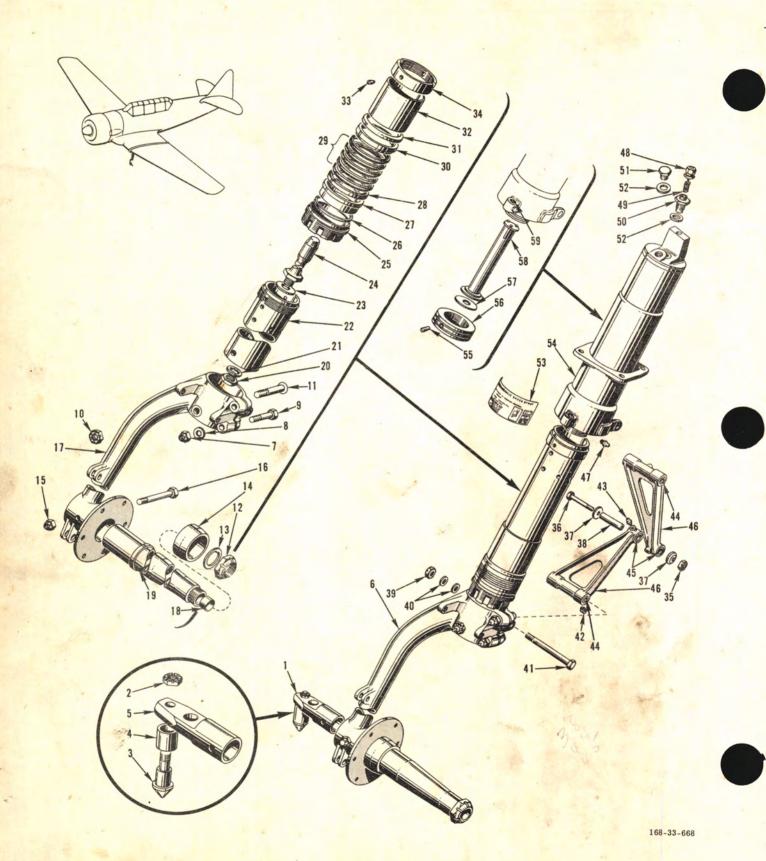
MAIN LANDING GEAR SHOCK STRUT ASSEMBLIES
